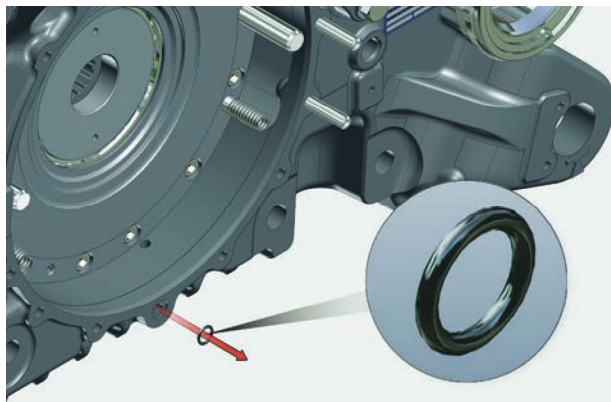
Remove the pressurised lubrication circuit o-rings.
